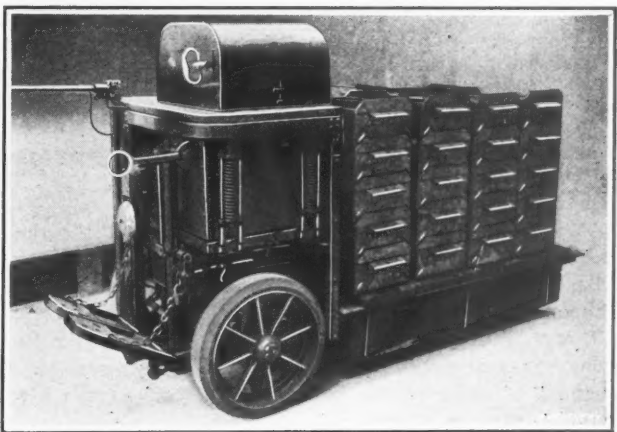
This illustration shows how steel balls are handled in the New Departure Mfg. Co.'s plant in Bristol, Conn. Balls are placed in steel tote boxes made by the New Britain Machine Co., New Britain, Conn., and stacked up on the platform of an elevating truck built by the Elwell-Parker Electric Co., Cleveland, Ohio
